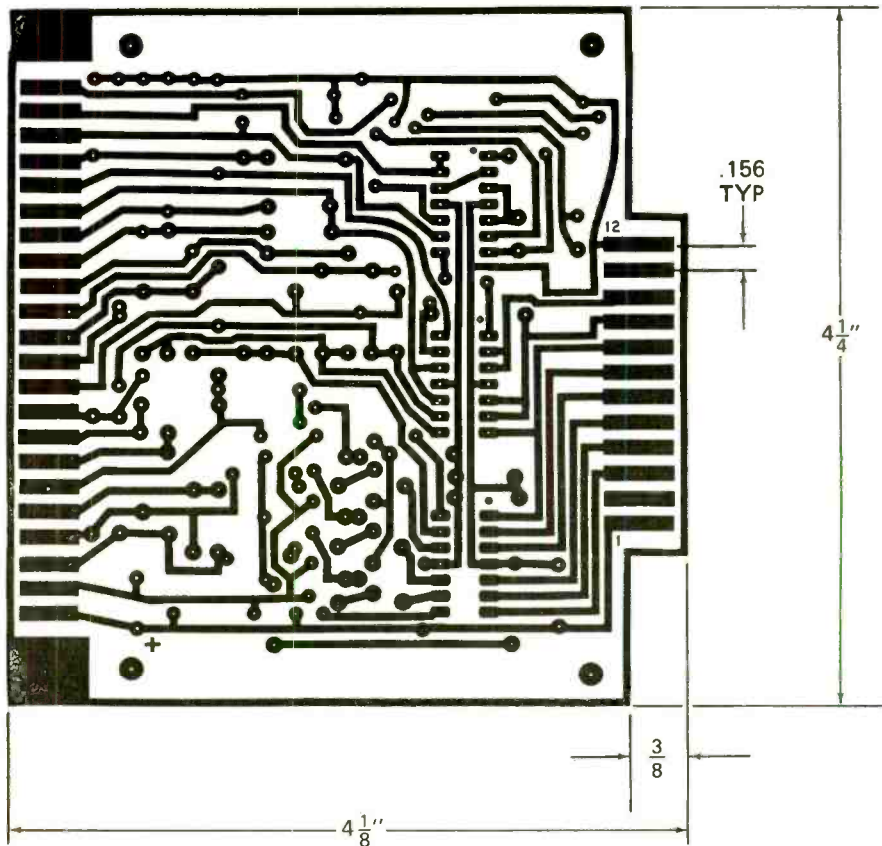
FOIL PATTERN FOR THE ENCODER PC BOARD. This board mounts just below the keyboard and connects to it through flat cable, PC connectors or direct wired jumpers.
